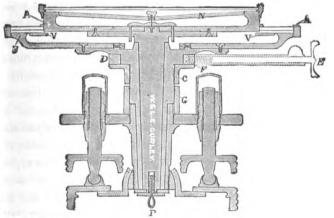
SECTION OF ENGINEERS' TRANSIT.
